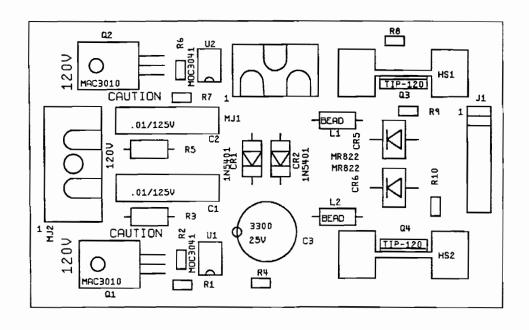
Solenoid/Motor PCB Assembly A049468-01 A
